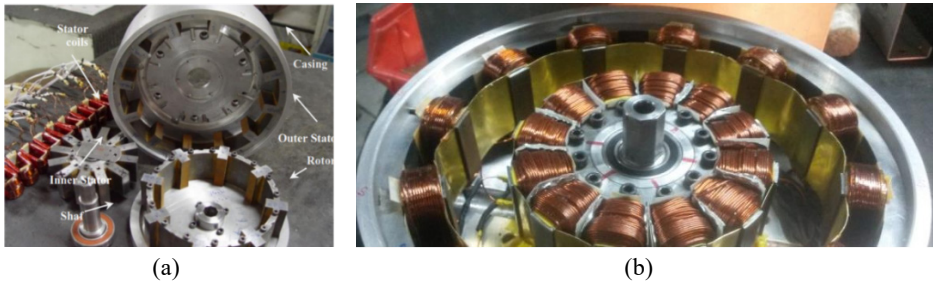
(a) Different parts of motor, (b) Assembled stators of the motor
